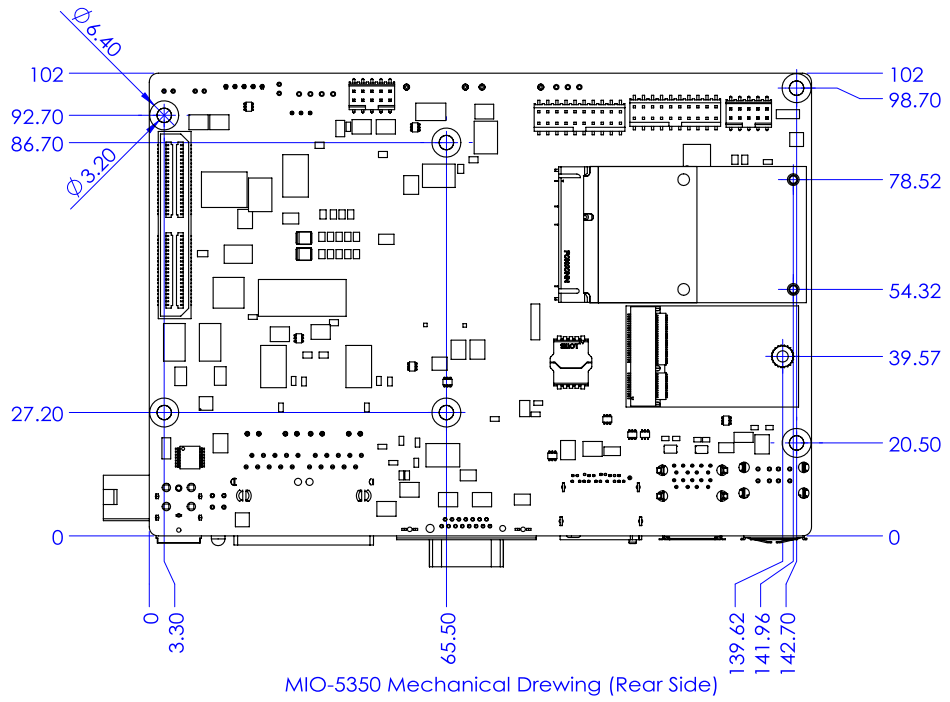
MIO-5350 Mechanical Drawing (Bottom Side)
